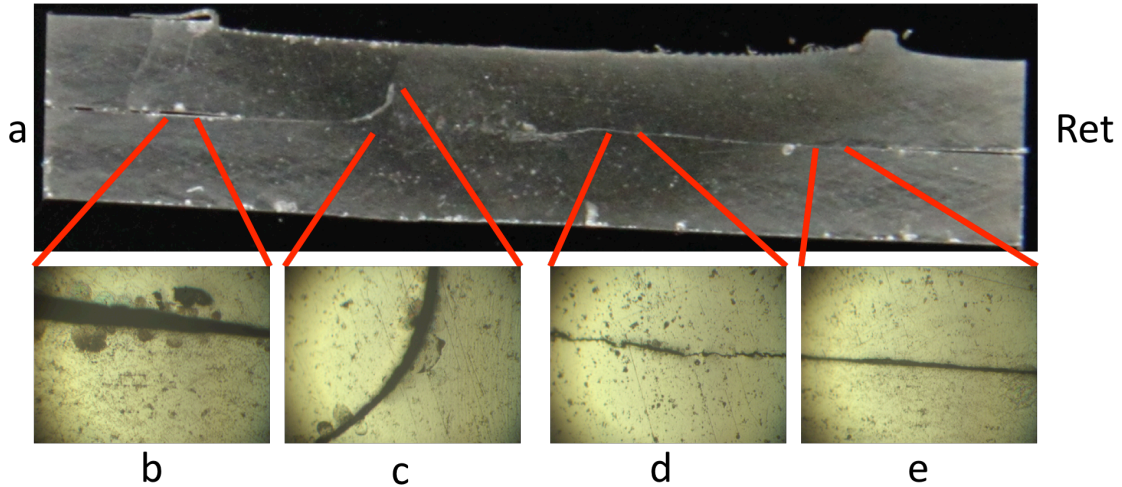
Weld 2: 14 ipm 2000 rpm 85% parent UTS, a) 1x image of weld zone, b) 10x view of gap between parent plates (advancing), c) 10x view of the hooking defect on the advancing side, d) 10x view of joint line remnant within the weld zone, e) 10x view of gap between parent plates (retreating)
